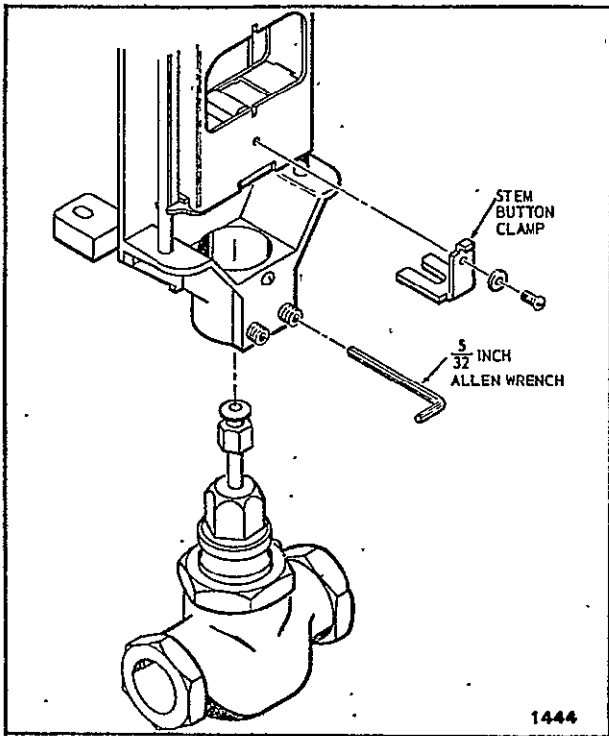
ASSEMBLY OF THE LINKAGE TO THE VALVE.
